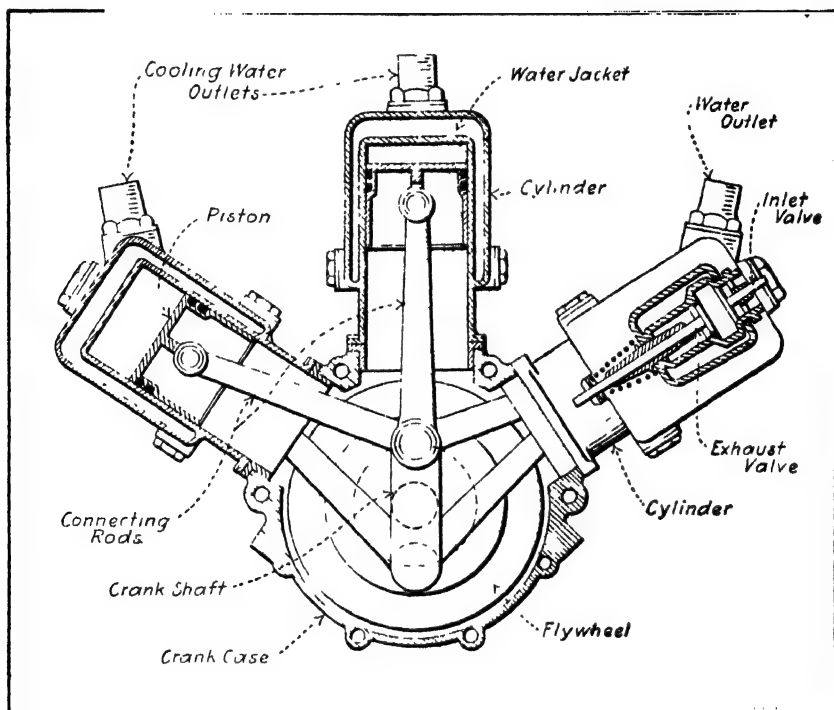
Transverse Sectional Elevation of the Anzani Six-Cylinder Water-Cooled Aviation Engine, which is the Ancestor of Modern Engines Using that Method of Cylinder Arrangement.
